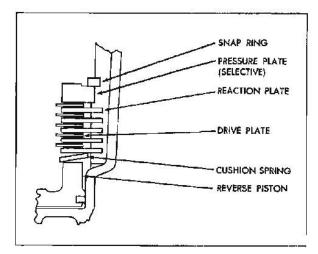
Reverse Clutch Rack Assembly Sequence
